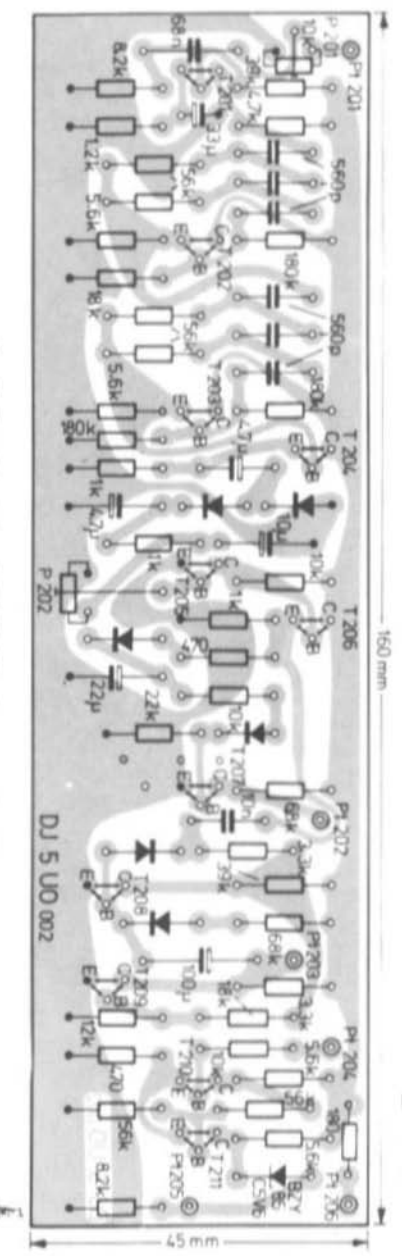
Printed circuit board DJ 5 U0 002 and component locations
